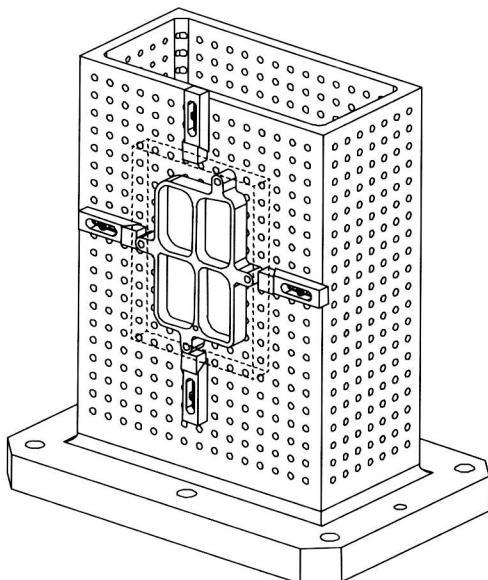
A typical ‘tombstone’ fixture for a horizontal CNC machine
